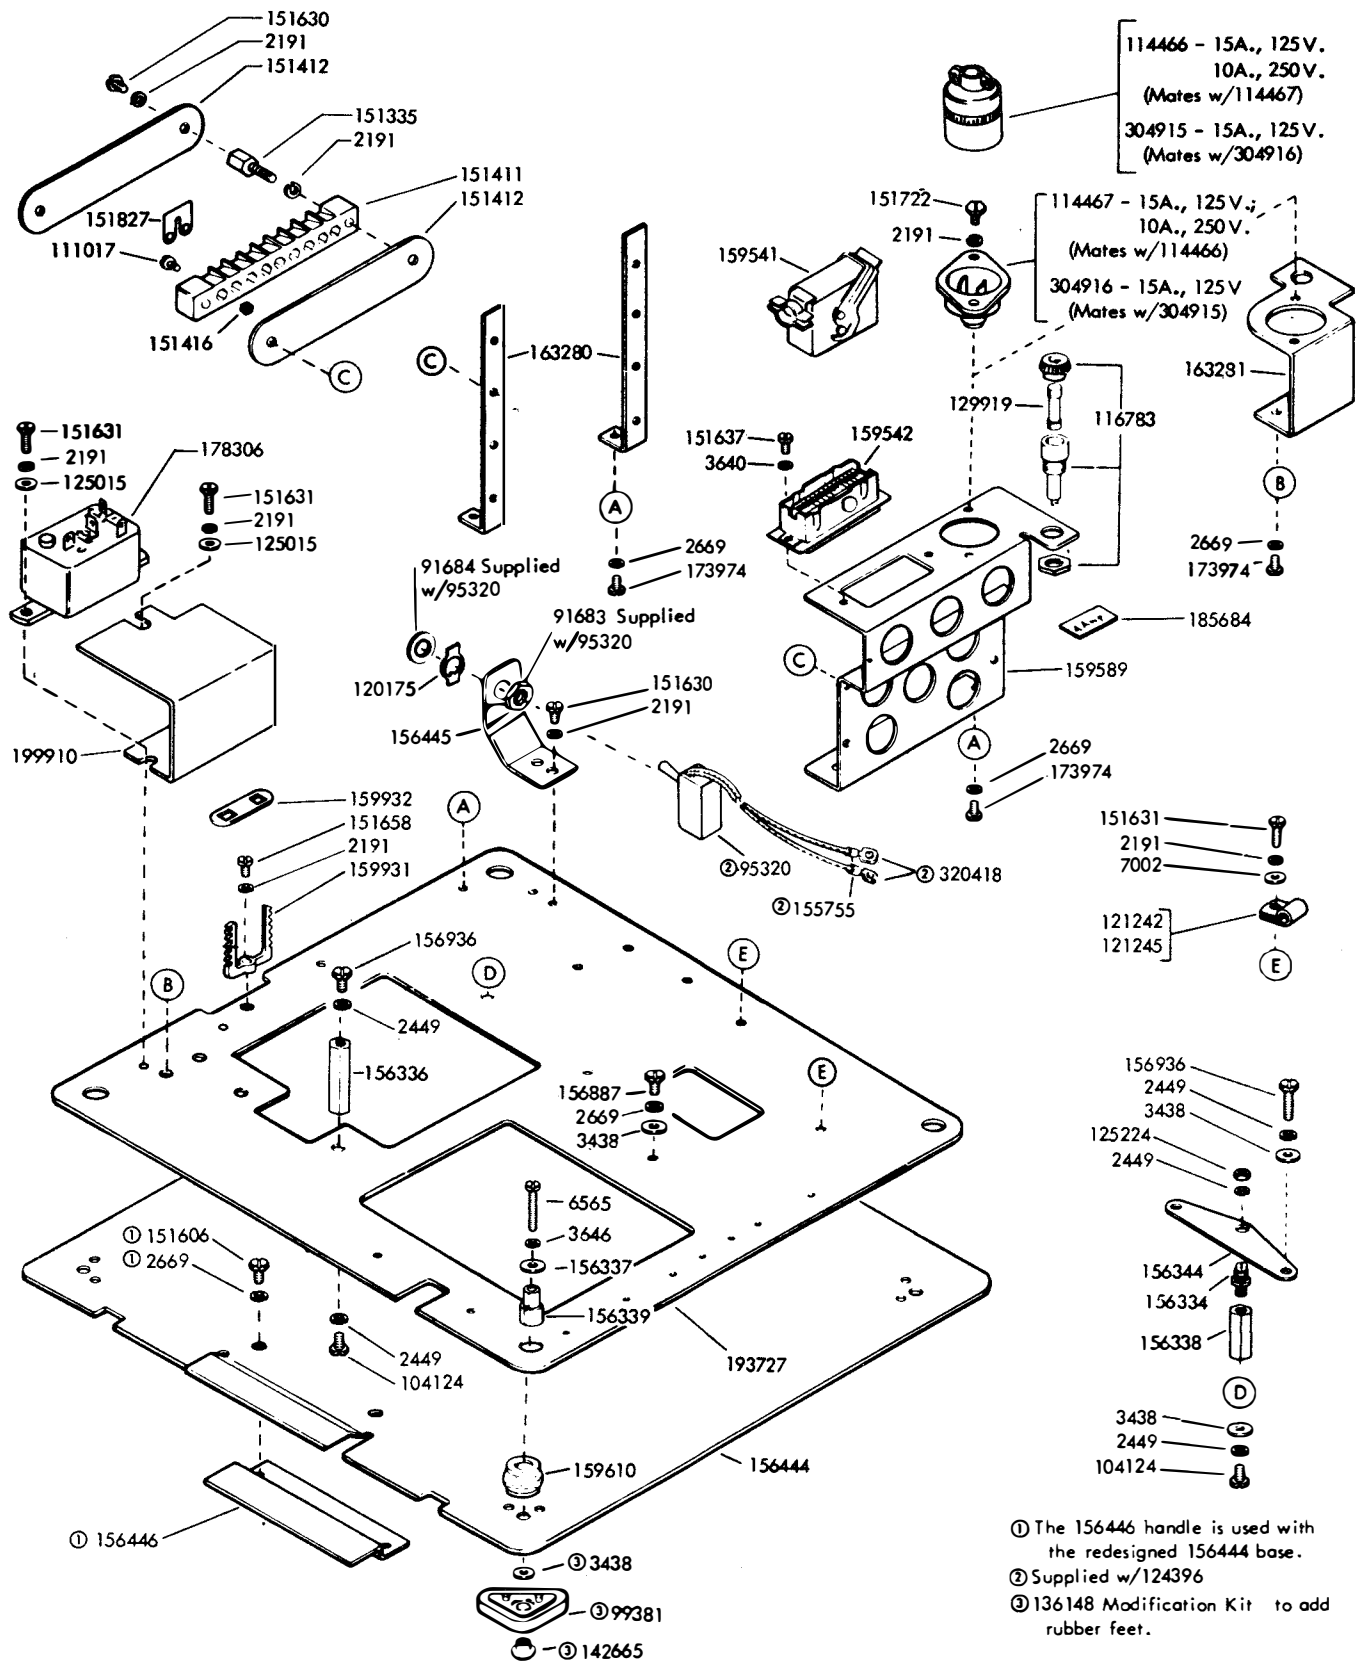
Reperforator Base - Double-Plate (Sheet 1 of 2)
